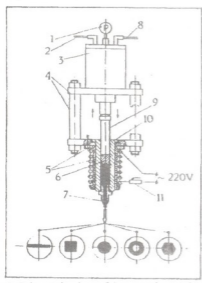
Schematic view of the experimental set-up used to mould the superconducting wires. (1) manometer, (2) oil pipe for return of piston rod, (3) hydraulic press, (4) carcass, (5) heater, (6) high-precision packer, (7) tip, (8) oil pipe, (9) punch, (10) case.
